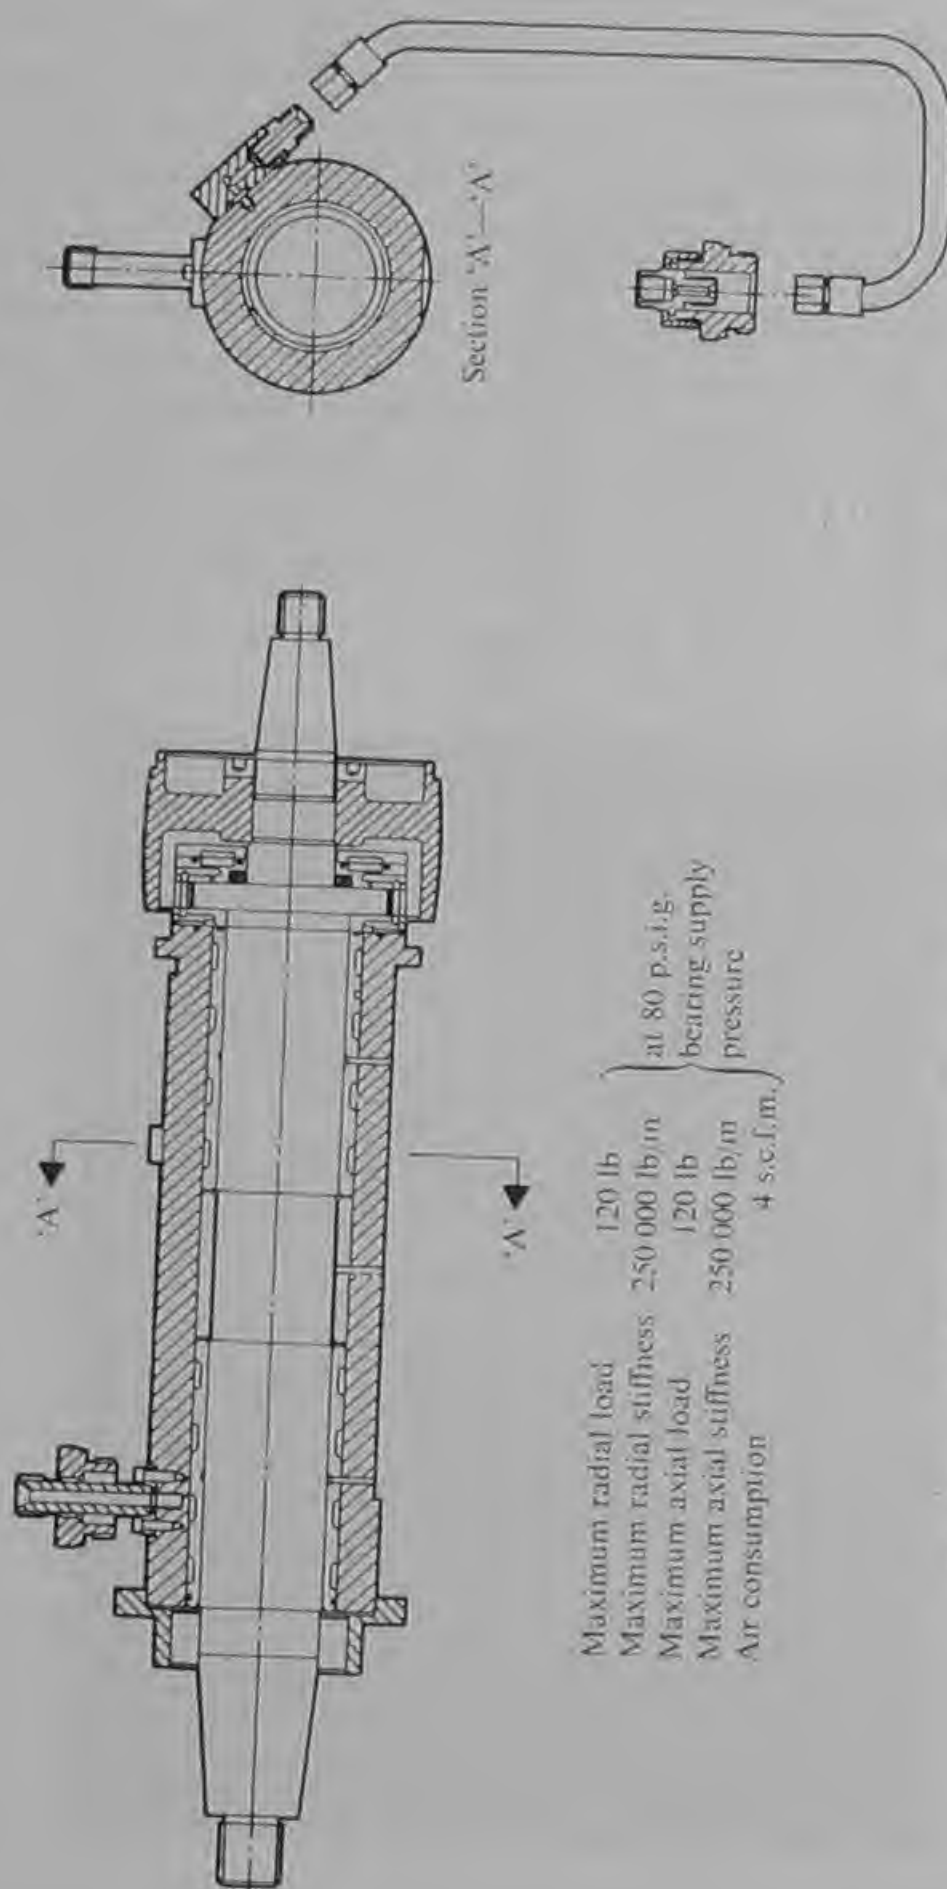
Air bearing wheelhead for Studer 450 cylindrical grinding machine
